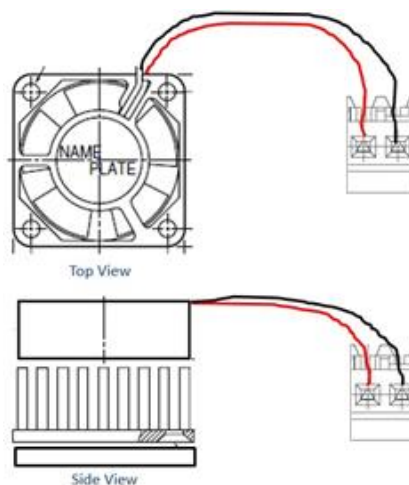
AES-S32V-NXP-G (Carrier board) 12VDC HeatSink and Fan Assembly
